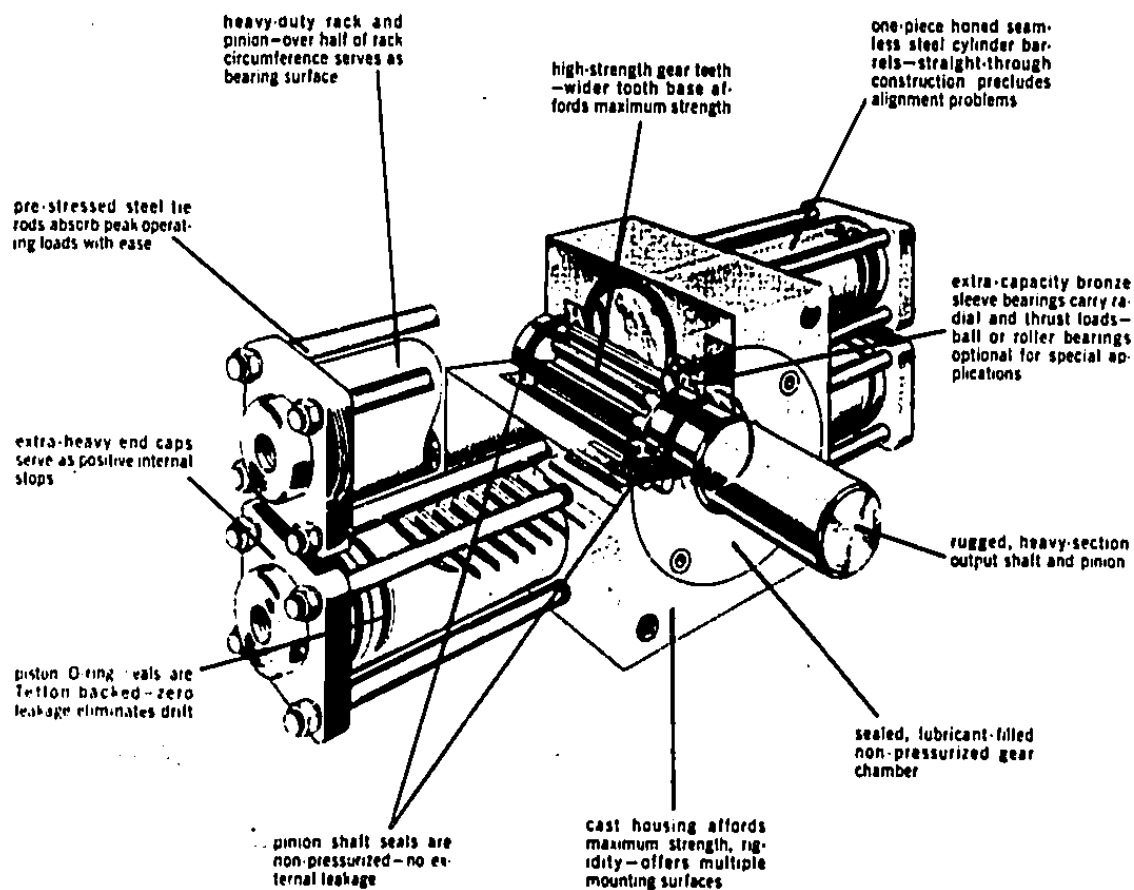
B. A FLO-TORK rotary hydraulic actuator.
